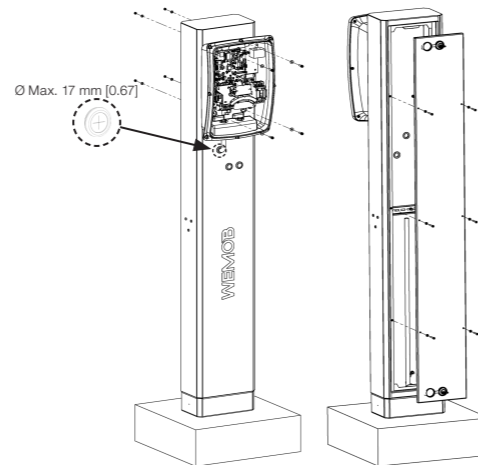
Example of the mouting of the WALL G2 station on the pole
